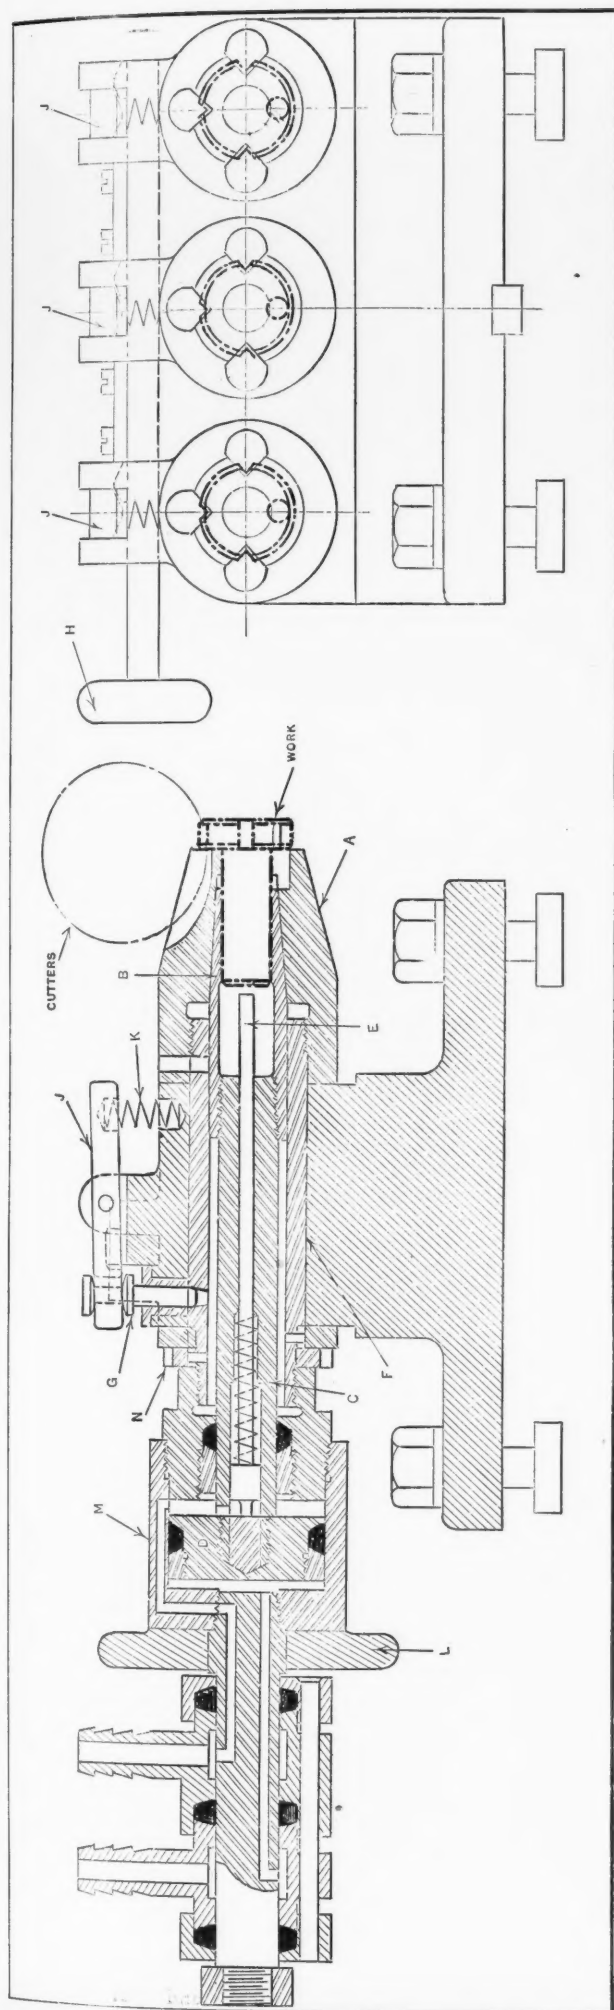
Three-spindle Fixture with Novel Indexing and Locking Means
